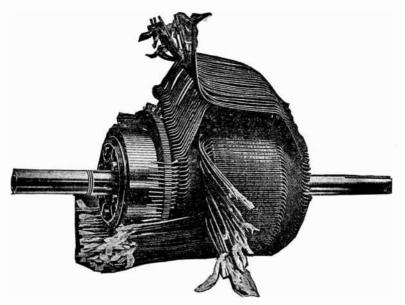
Holzer Cabot partially wound barrel wound armature showing arrangement of coils. The core is built up of thin discs of soft annealed steel, which are slotted to allow the wire to sink below the surface, this being sometines called iron clad construction. The discs are held by end plates, clamped without through bolts. The coils are machine formed of round ribbon or bar copper depending on the size and purpose of the machine, being without joint except at the commutator. They lie in insulated troughs, the upper layers being insulated from the lower layers by fibre.
